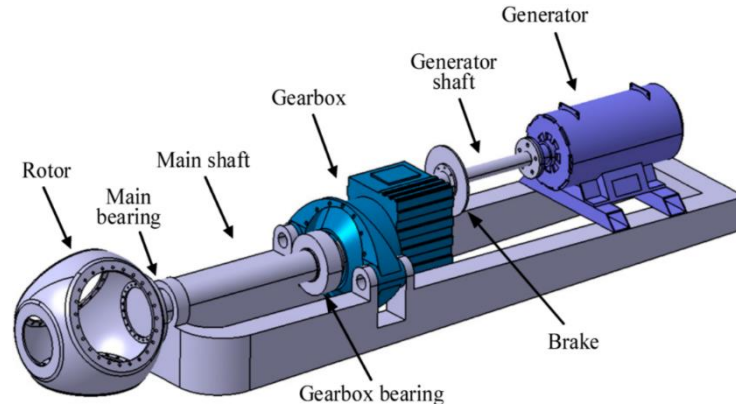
Example of wind turbine drivetrain and its components. [6]
